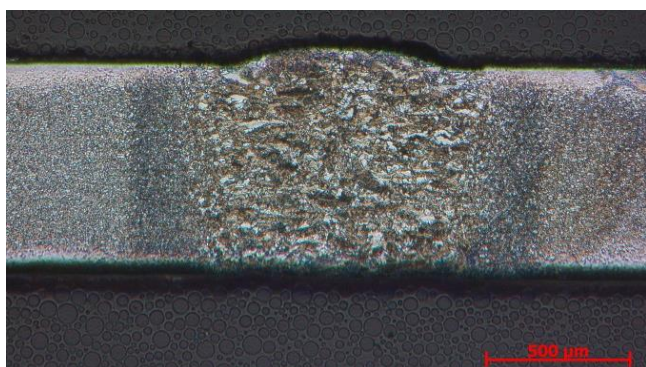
Macrostructure of laser-beam welded H220PD
